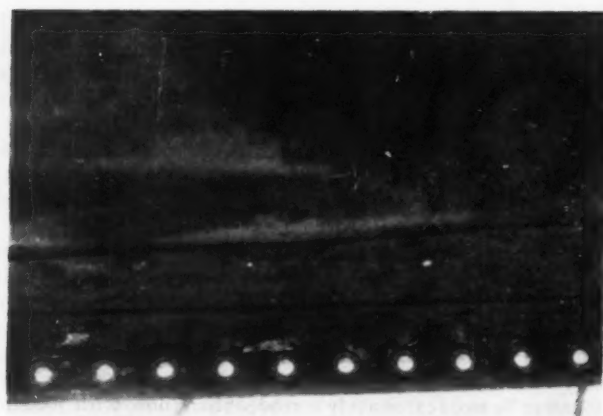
AIRPLANE K: LOWER LEFT-HAND INBOARD REAR WING ATTACHING ANGLE; WING STATION 142
